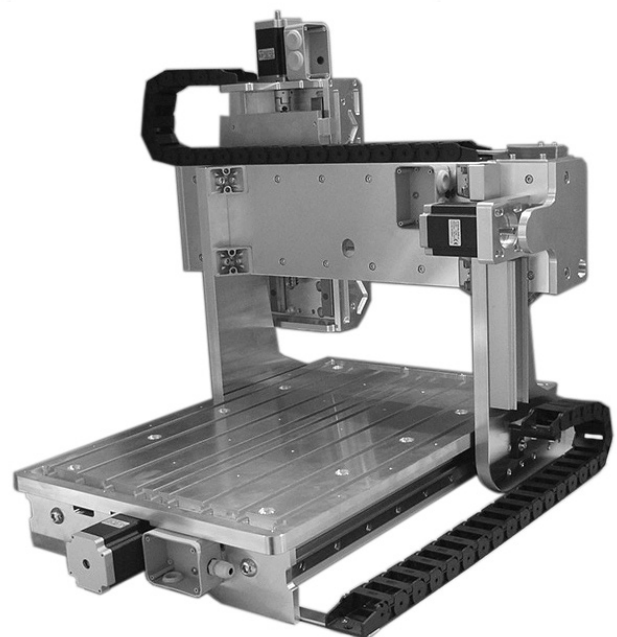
Compact-Line portal milling machine with drag chains, terminal boxes, etc. (rear view)
